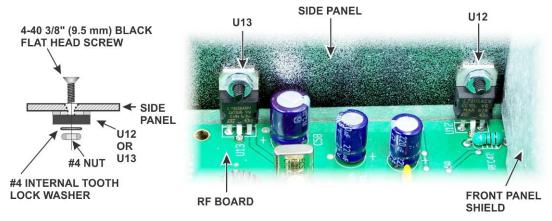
Attaching U12 and U13 to the Right Side Panel.
